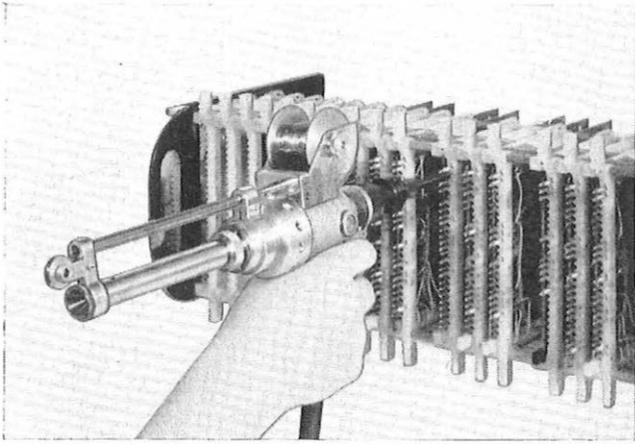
METHOD OF CONNECTING PRINTED BOARDS BY BOUND WRAPPED JOINTS
